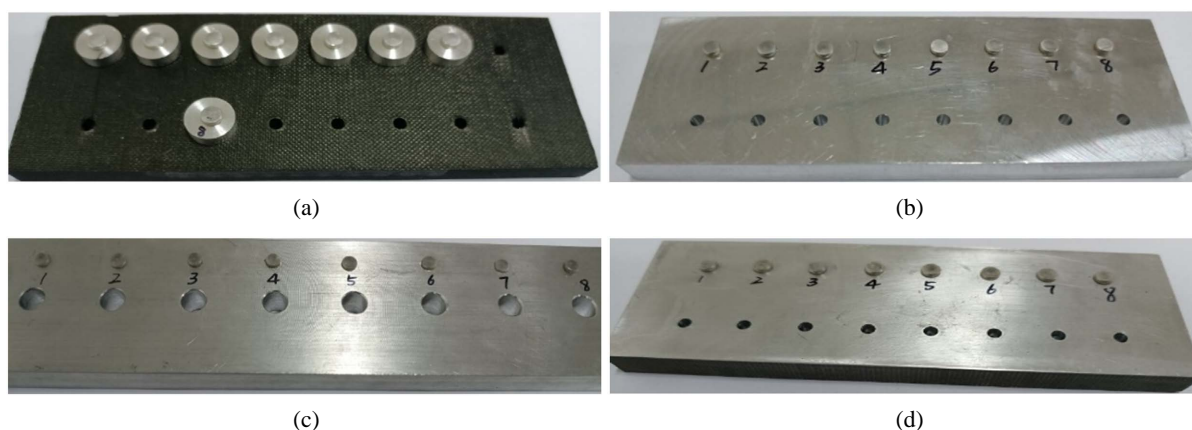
Scheme 1~Scheme 4 Appearance of test piece after riveting. (a) $\phi 2.5 \times 13$ (100°) riveted with composite material + 2A14-T6; (b) $\phi 2.5 \times 13$ (100°) riveted with cast aluminum ZL205A-T6; (c) $\phi 2.5 \times 13$ (100°) riveted with 2A14-T6; (d) $\phi 2.5 \times 13$ (100°) riveted with 7050-T7451
